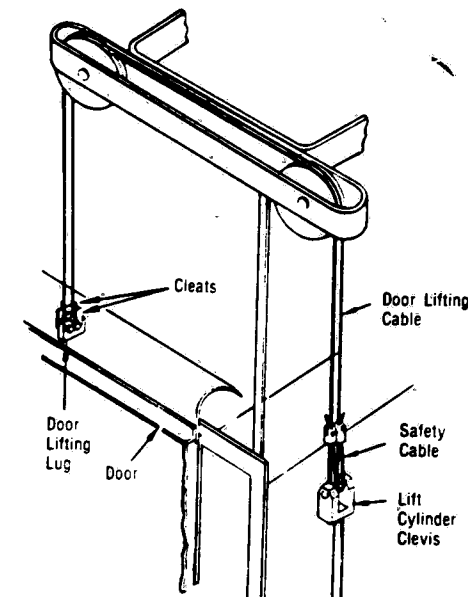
ROUTING DOOR LIFTING CABLE.
